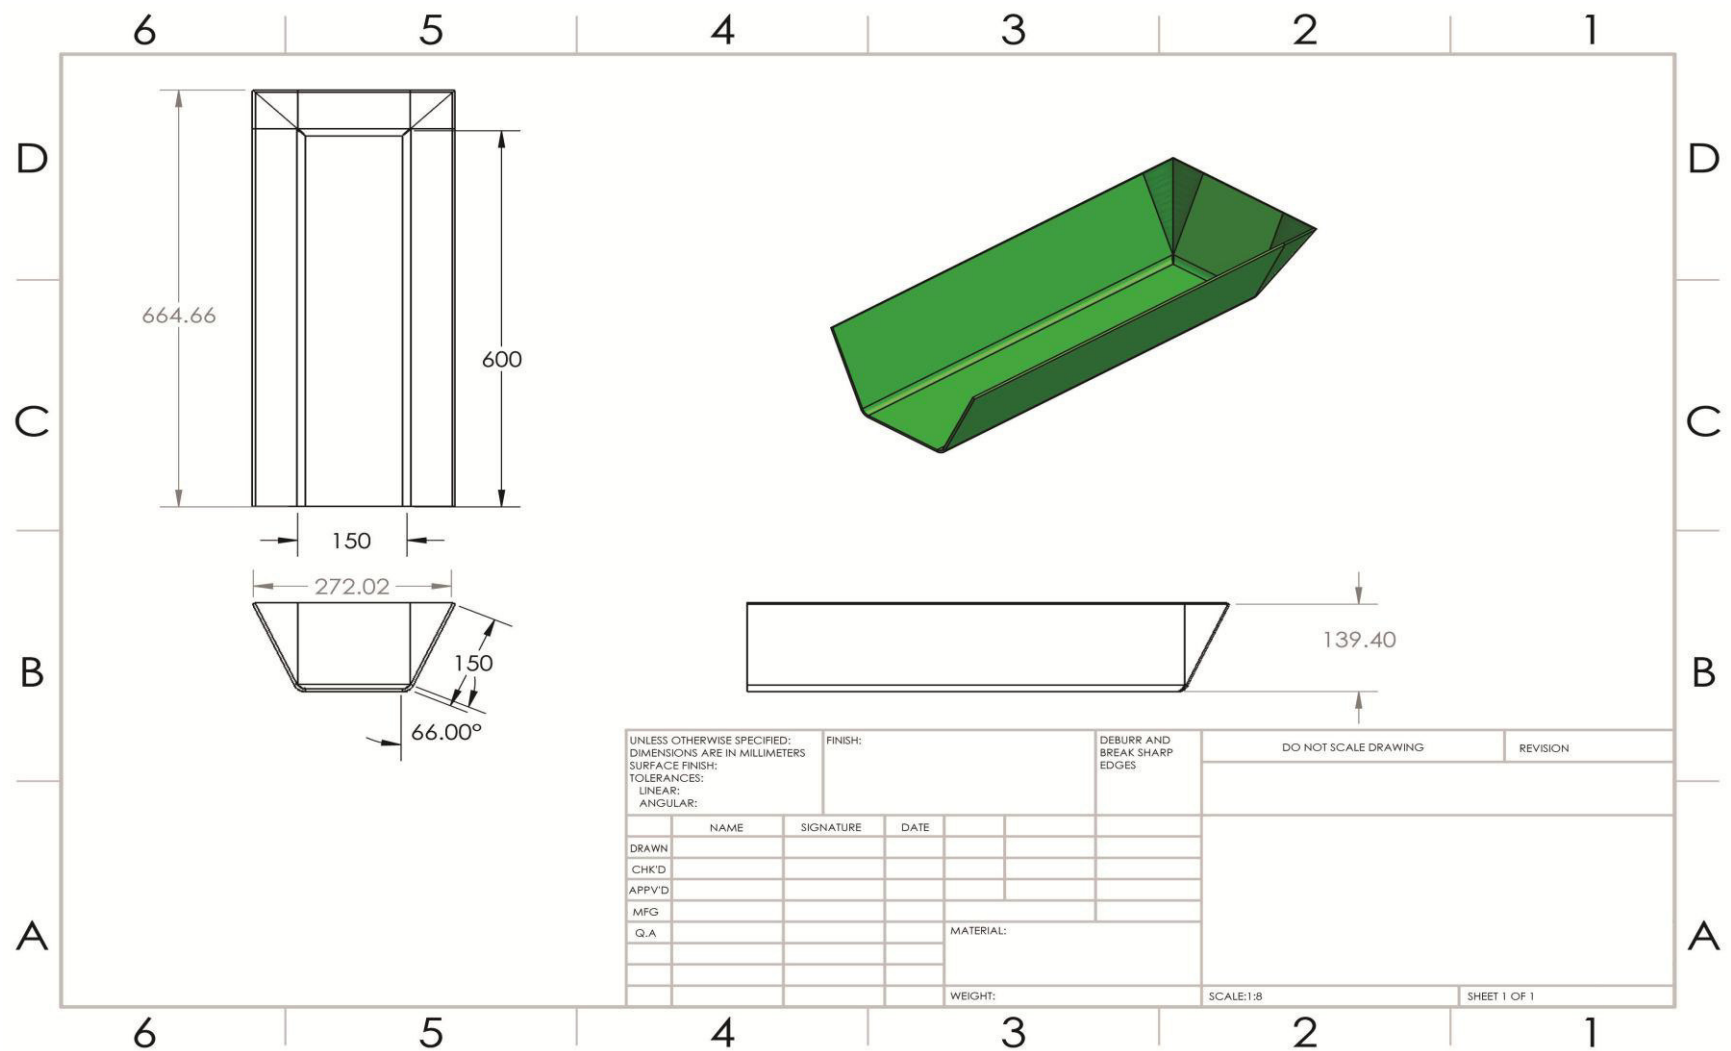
Engineering drawing of the receiving tray-3 (Dimensions are in mm)
